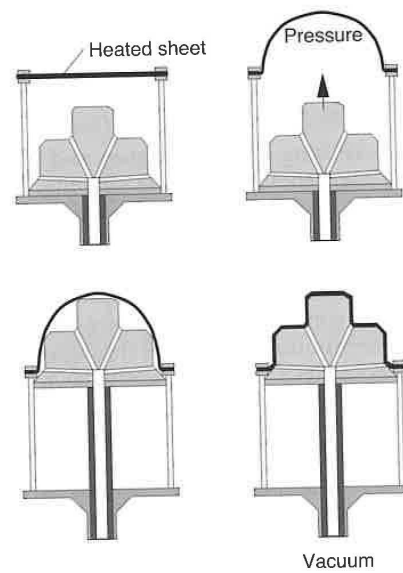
Reverse draw thermoforming with plug-assist and vacuum.
